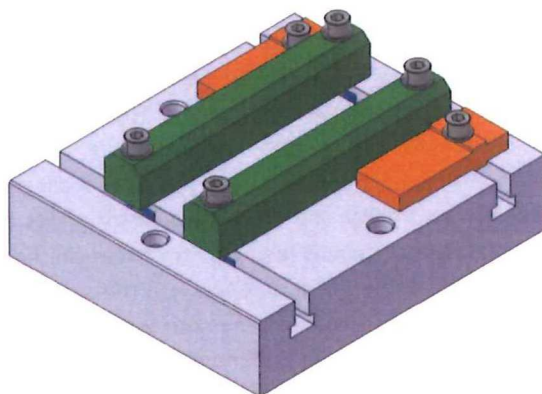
The Z51414 fixture designed to both flexible and simple.
